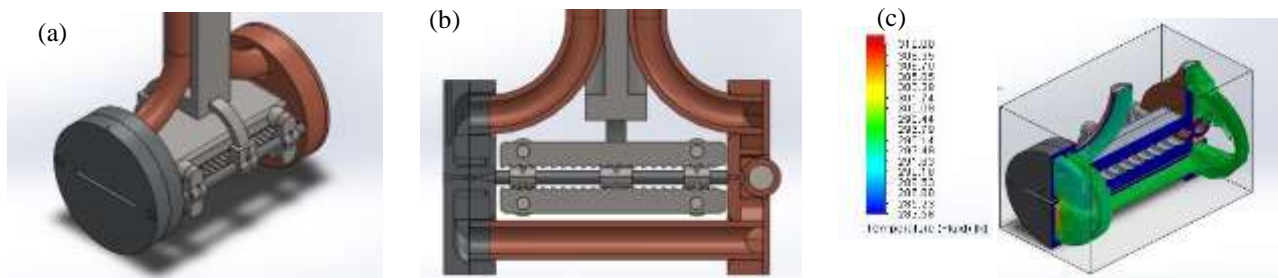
Final mechanical design assembly of the scanner and the cooling mechanism; isometric (a) and cross-section (b) views; (c) fluid temperature throughout the device.
